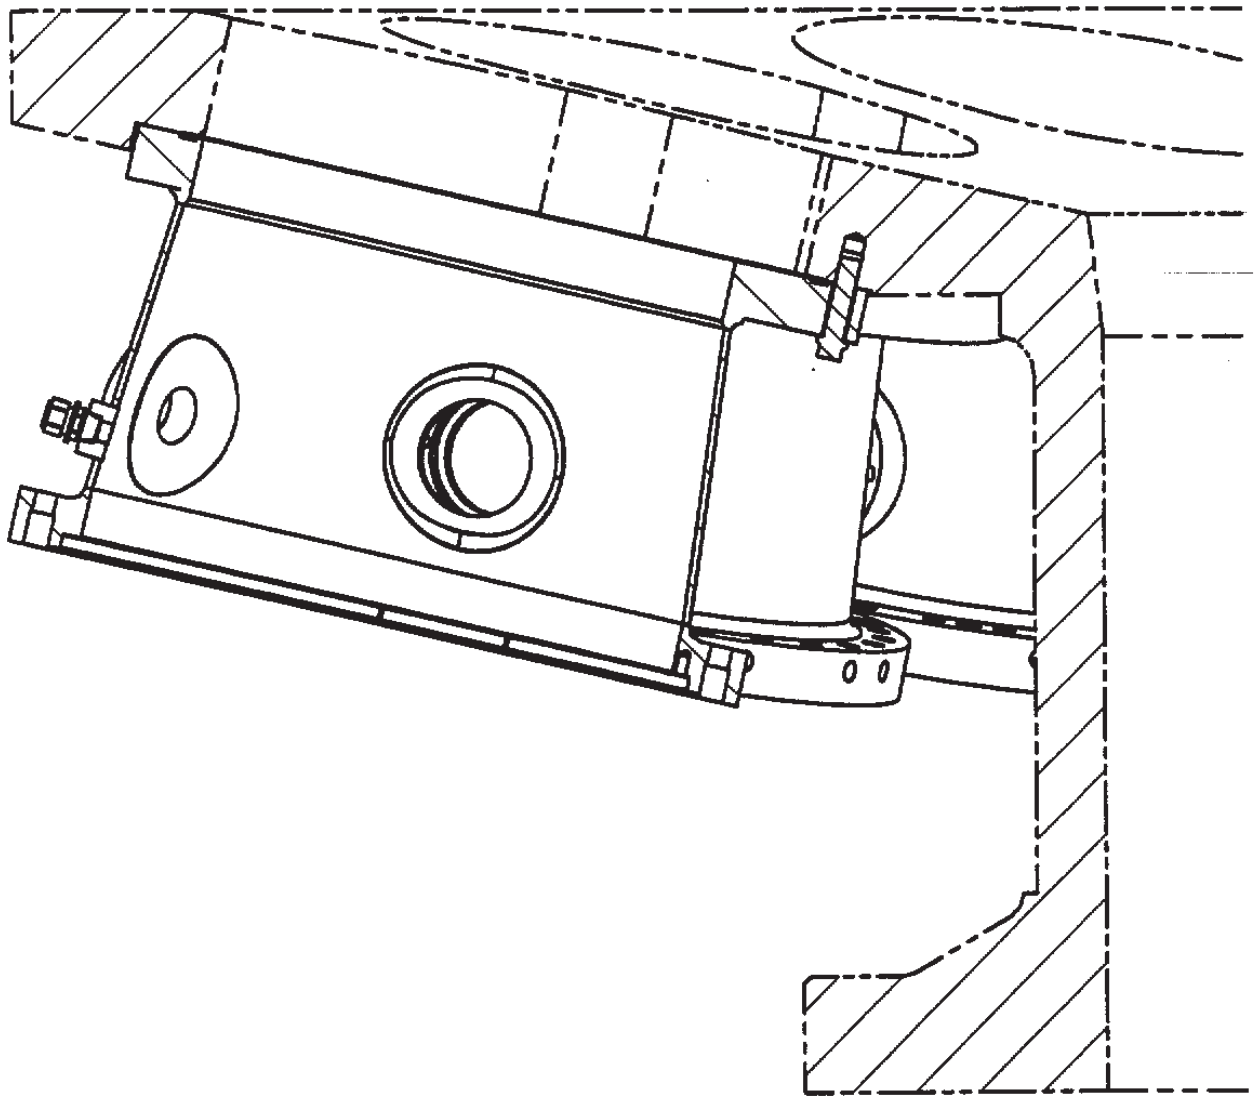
Aft Casing Assembled to Compressor Casing
